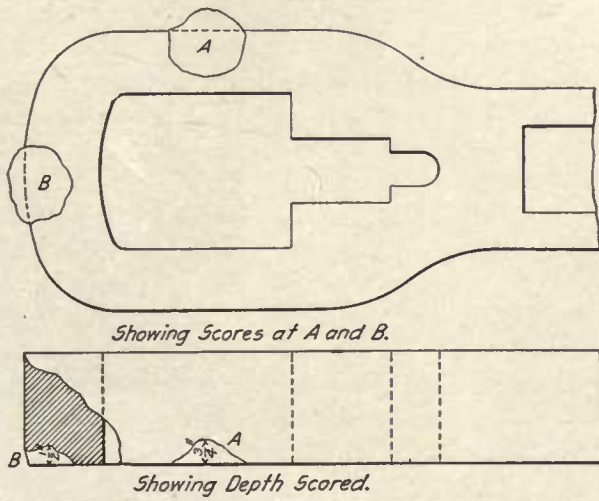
Scored Connecting Rod Repaired by Oxy-Acetylene Welding.
